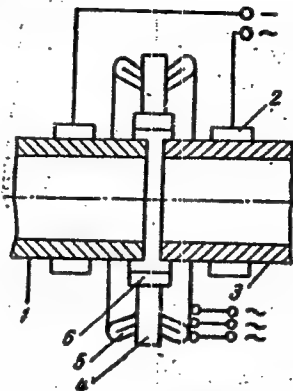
Schematic of the device for welding of pipes by a rotating arc, displaced by a traveling magnetic field. 1 and 3 - pipe; 2 - welding-jolt-ramming mechanism; 4 - core; 5 - inductor windings; 6 - ring of heat-resistant material for protection of inductor.
